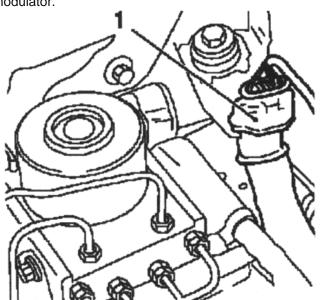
Connector tourniquet wires electro-hydraulic module:
